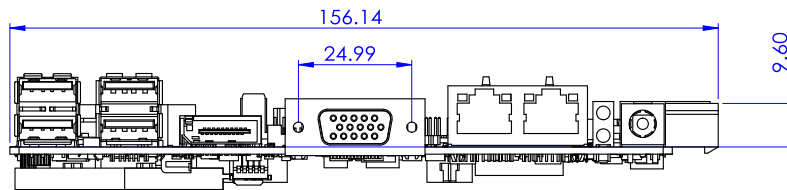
MIO-5350 Mechanical Drawing (Coastline)
